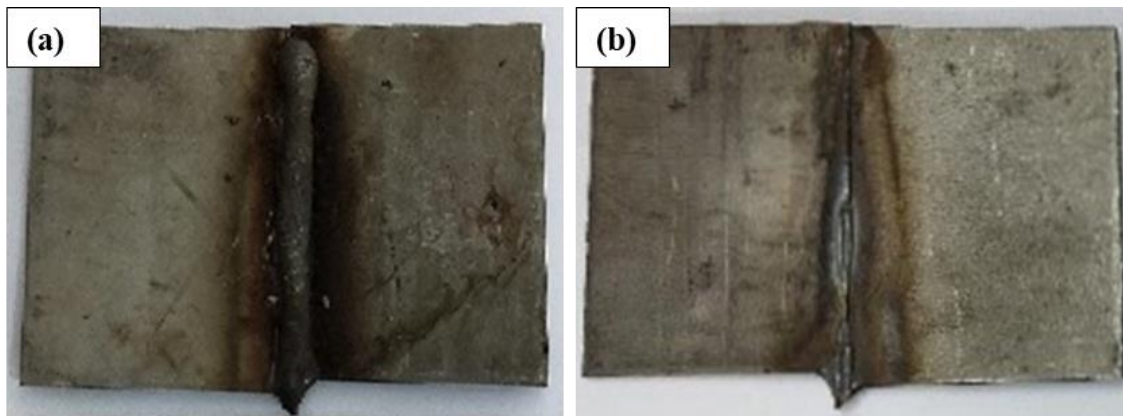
Image of the trial run weld sample: (a) top surface, and (b) bottom surface.
